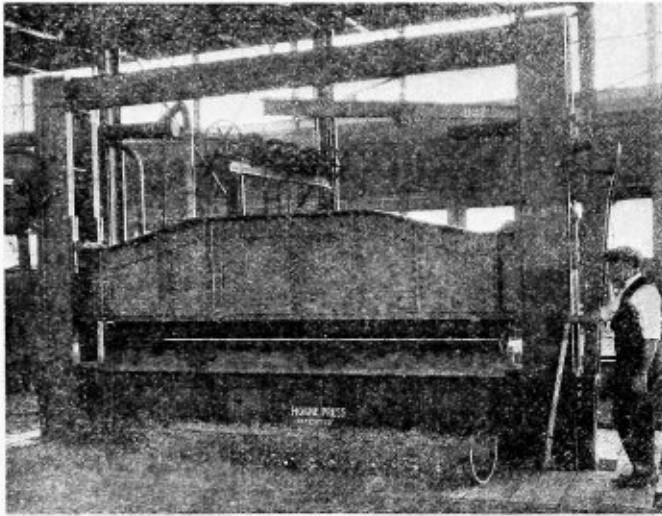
Frame and Toggle Arrangement of Plate Forming Press
